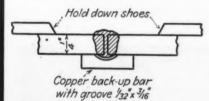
Cross-section of 26 in. pipe welded by the automatic process.
